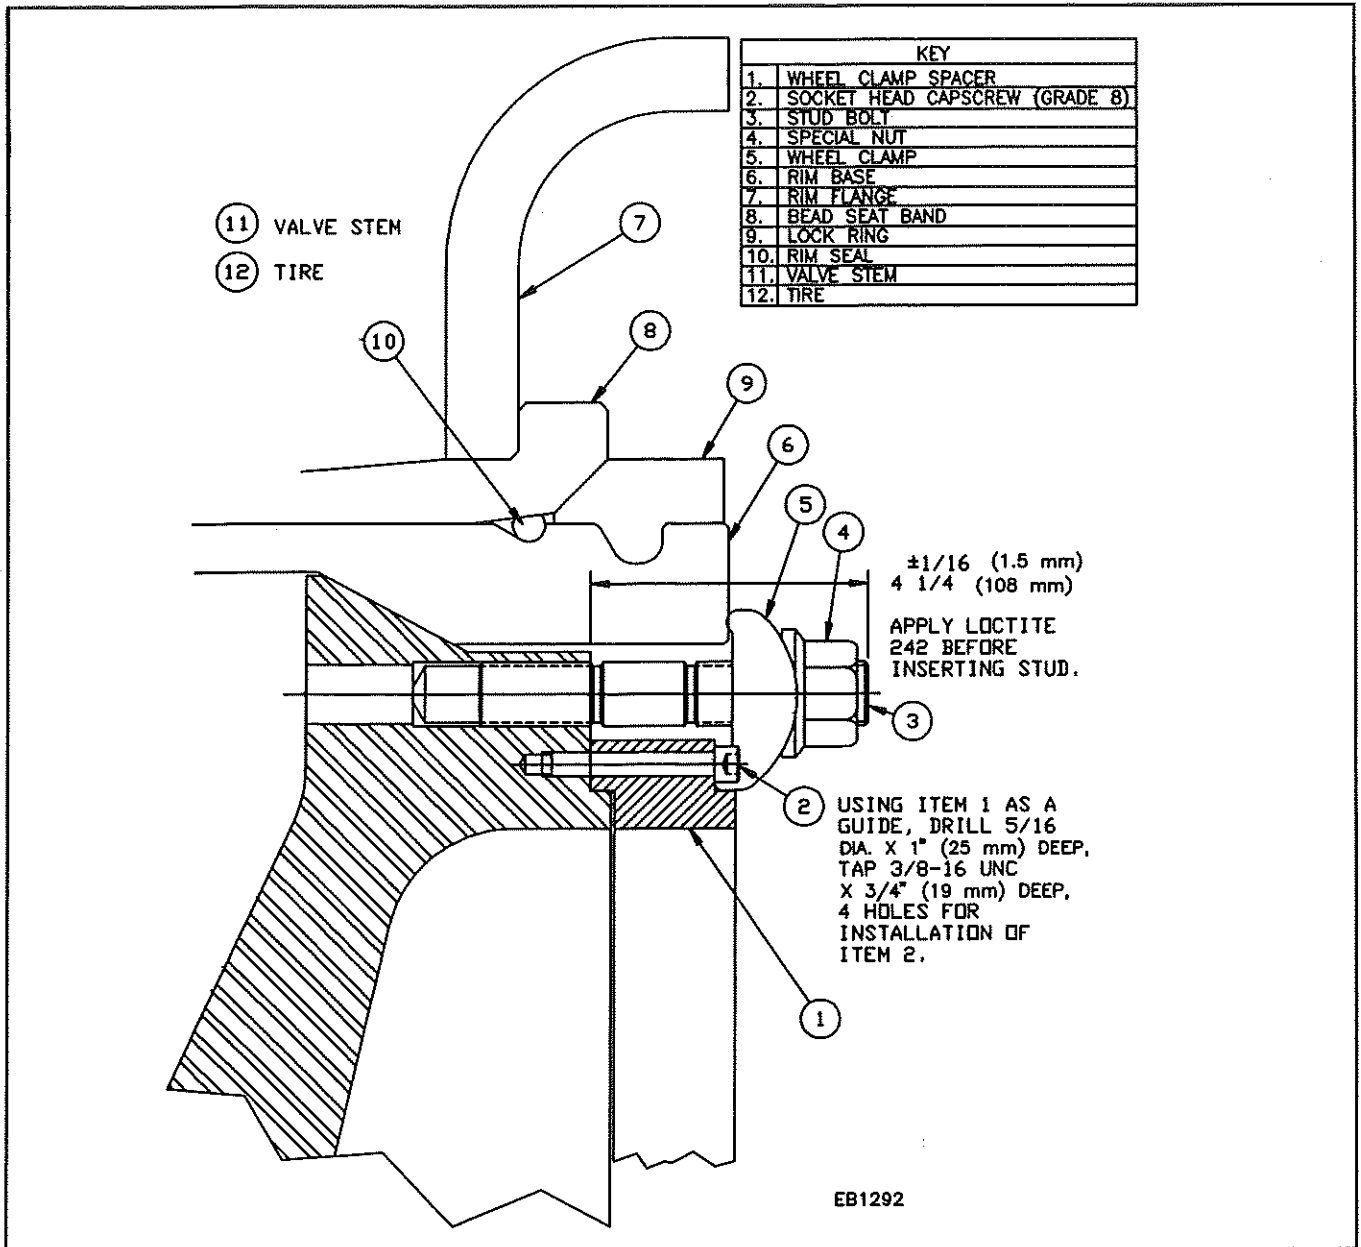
FRONT WHEEL ASSEMBLY (48/95R57 TIRES)
